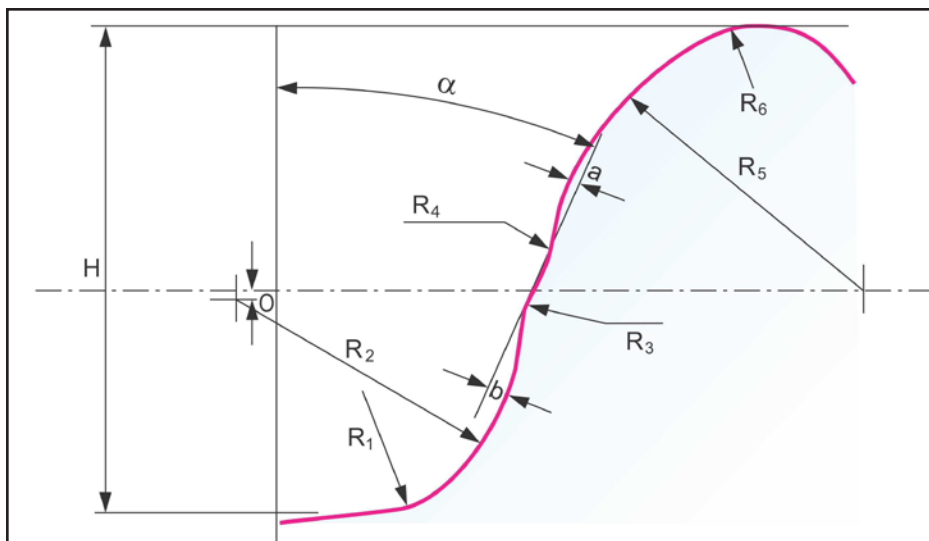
S-shaped cutting blade profile for spiral bevel gears.
